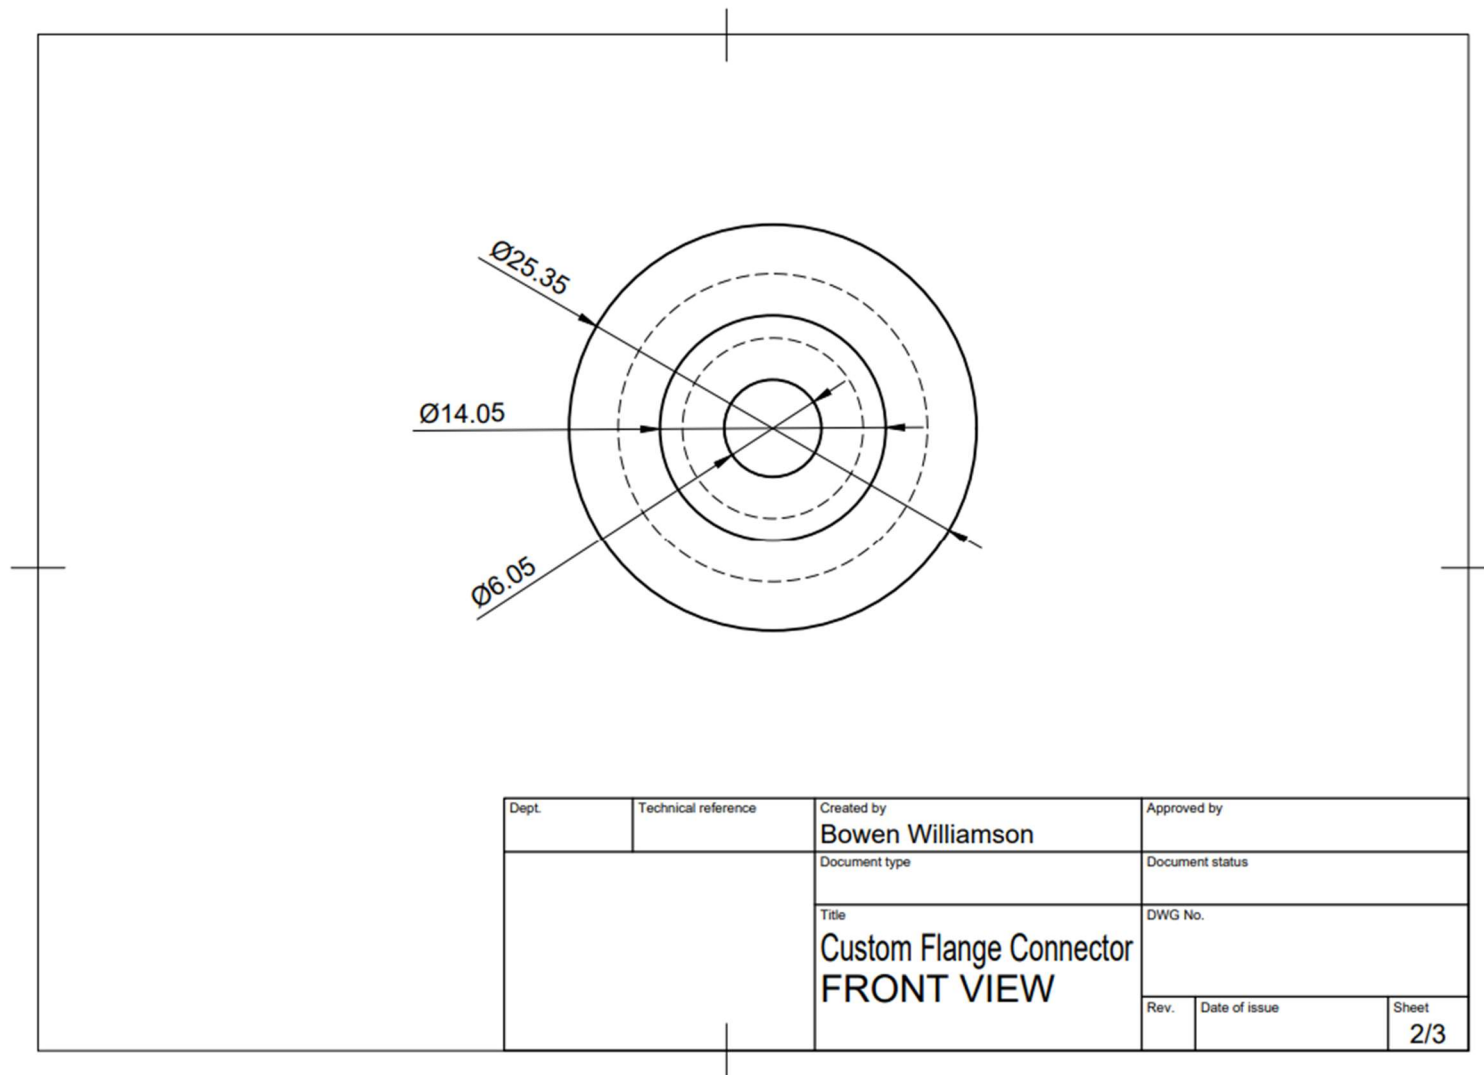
Manufacturing Drawing of SS#2-P#14 - Flange Coupling
